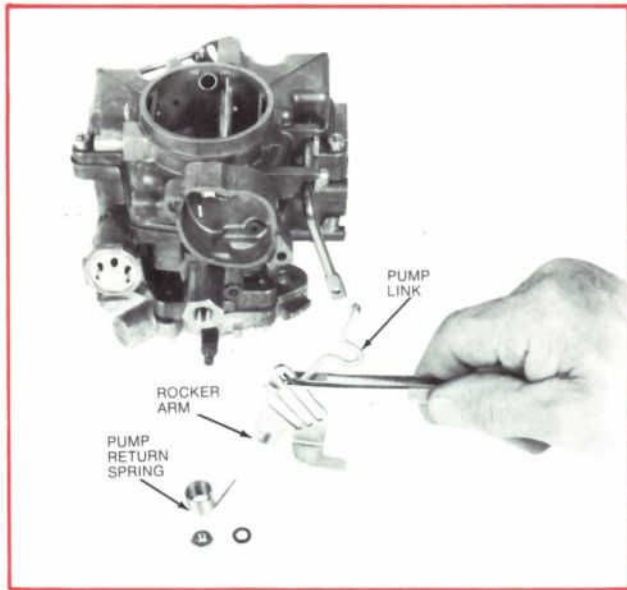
Removing Accelerating Pump Rocker Arm and Link
